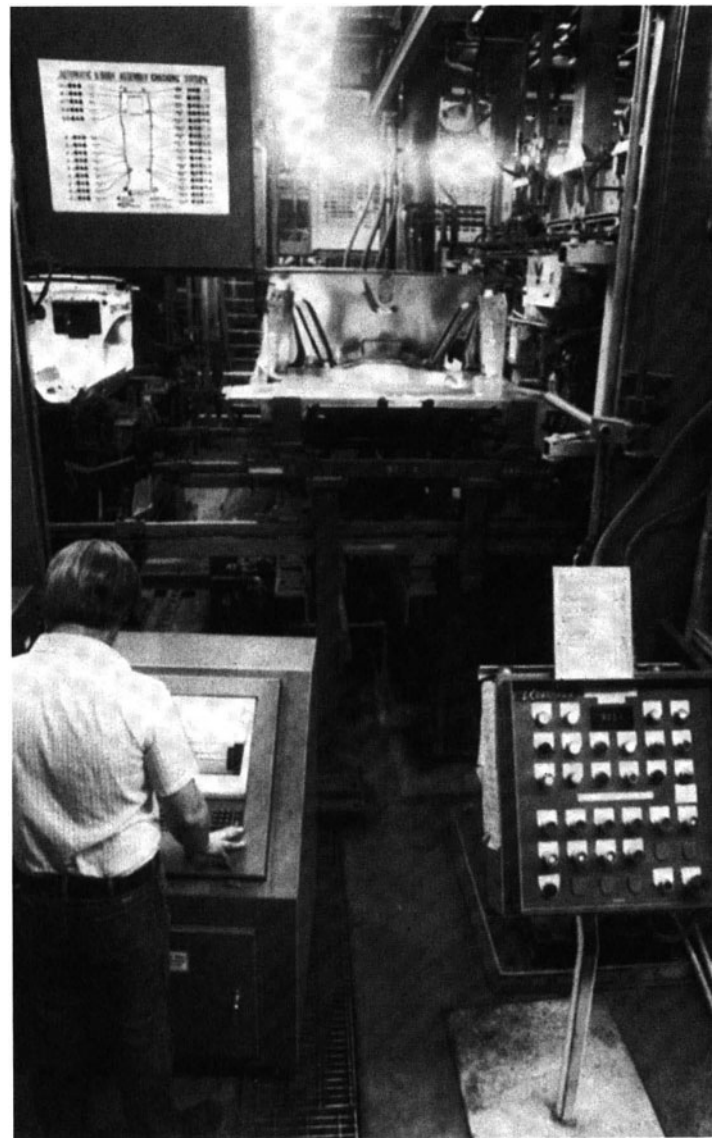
After car body welding is completed, underbody subassemblies for front-wheel-drive cars move into an automatic probe checking station shown here where thirty critical measurements are verified to assure sound, dimensionally precise platforms upon which to build the rest of the vehicle. Data from the fixture are fed to a computer which prints out a copy for the operator in foreground. A board which flashes "go or no-go" lights for a quick visual verification is included. This is shown on the panel at upper left. This installation is one of over a thousand computers of varying capacity used at this Orion Township, Michigan, plant of General Motors Corporation.
